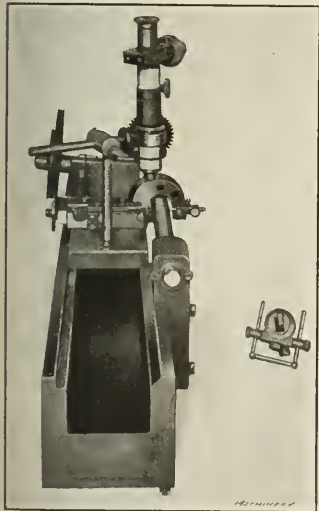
End View of Machine shown in Fig. 3, showing Yoke that supports Nut and Tool
